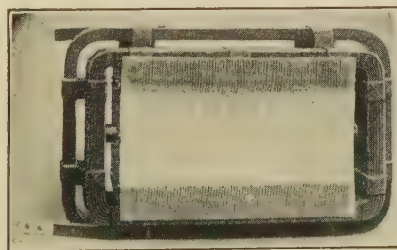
Face view of assembled pole unit. (*Courtesy the Westinghouse Electric & Mfg. Company.*)
